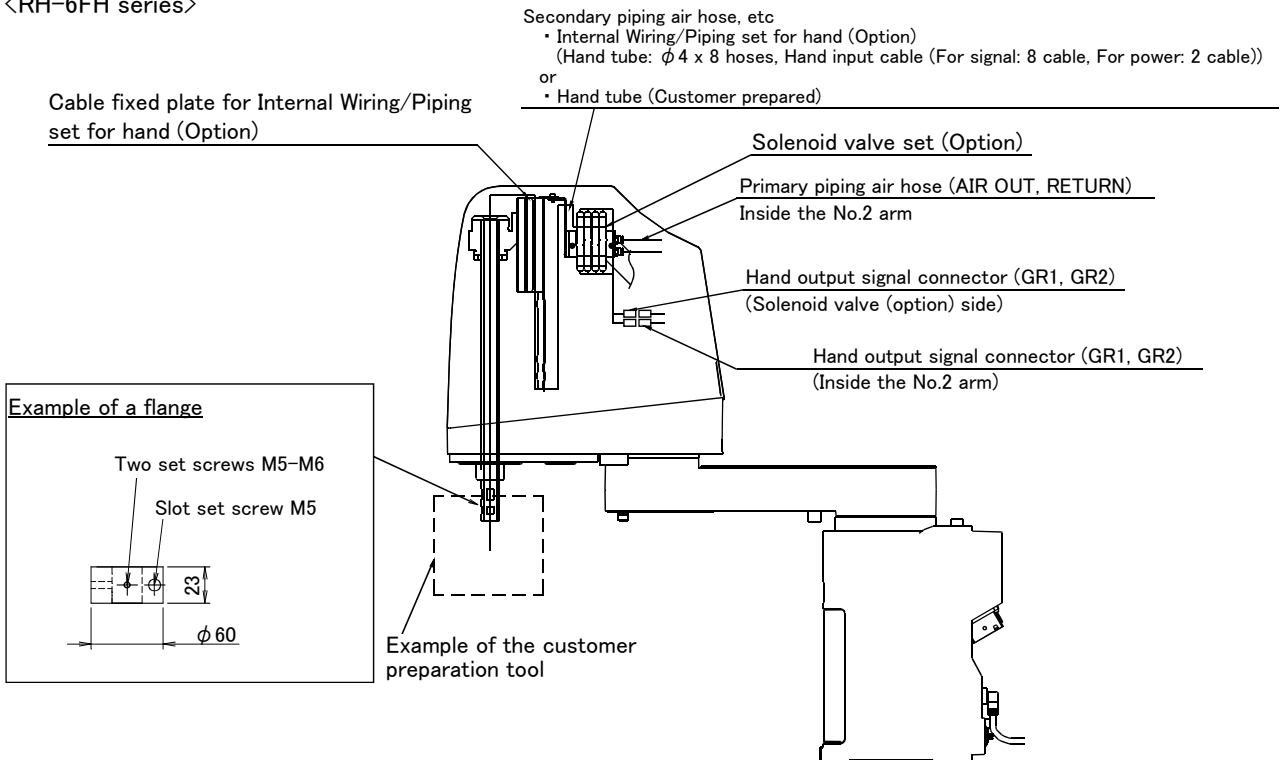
Example of wiring and piping <1> (RH-6FH series)
